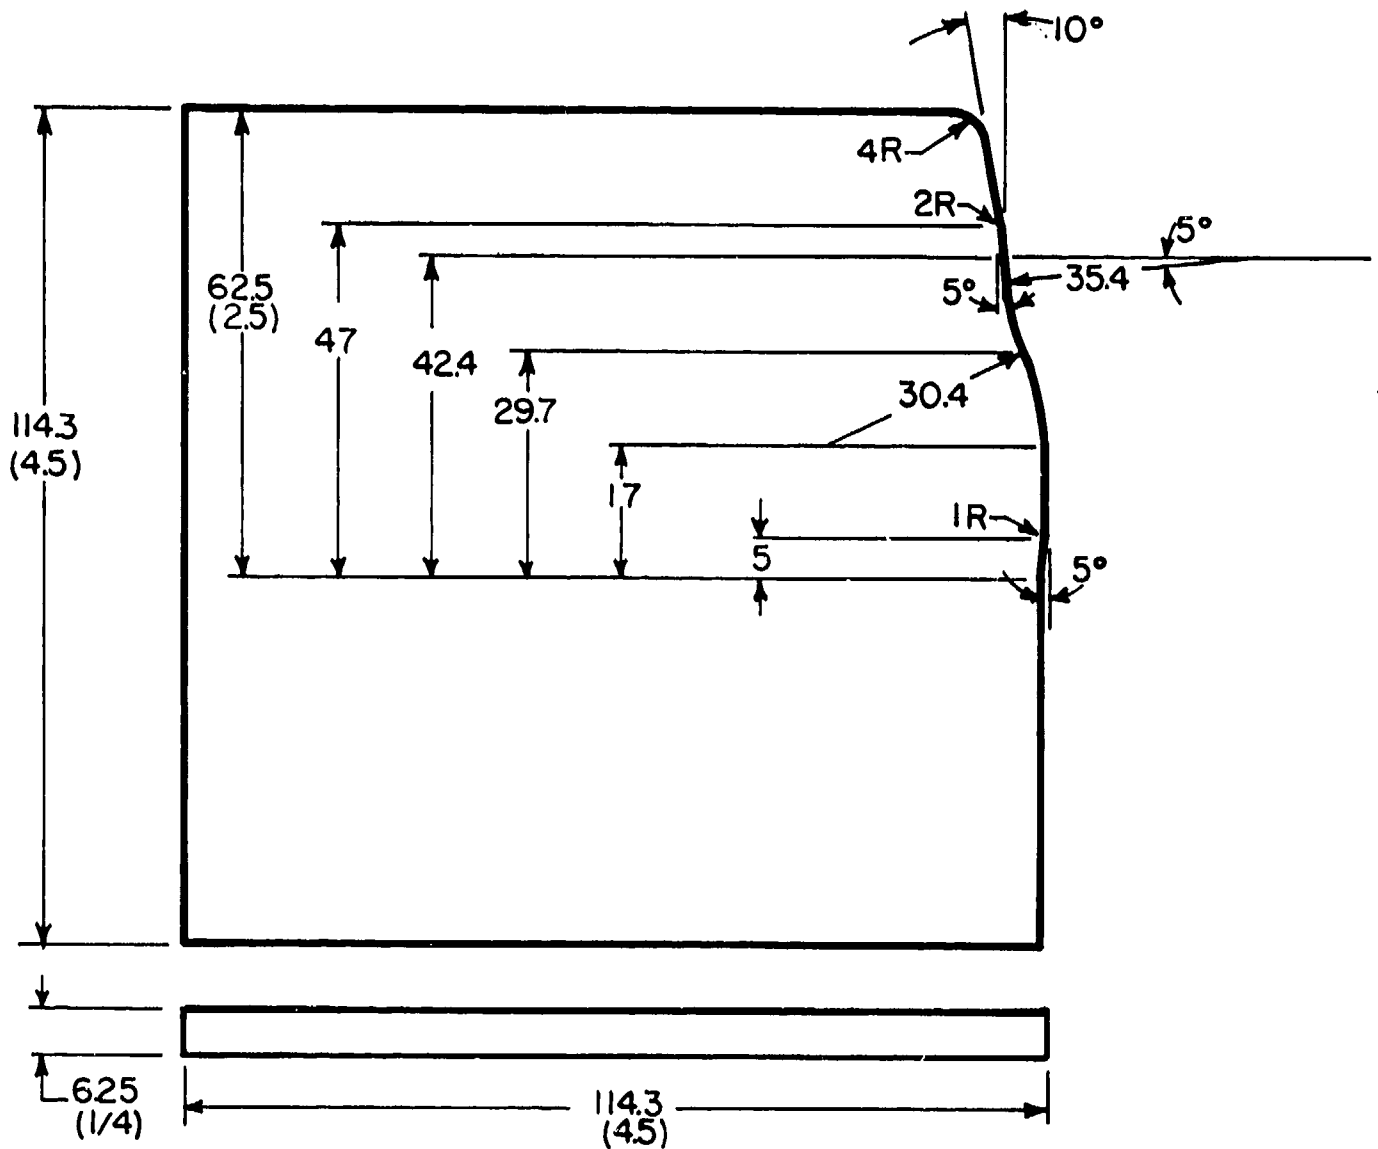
Sketch of template for hot drawing with double curvature die (first stage).
